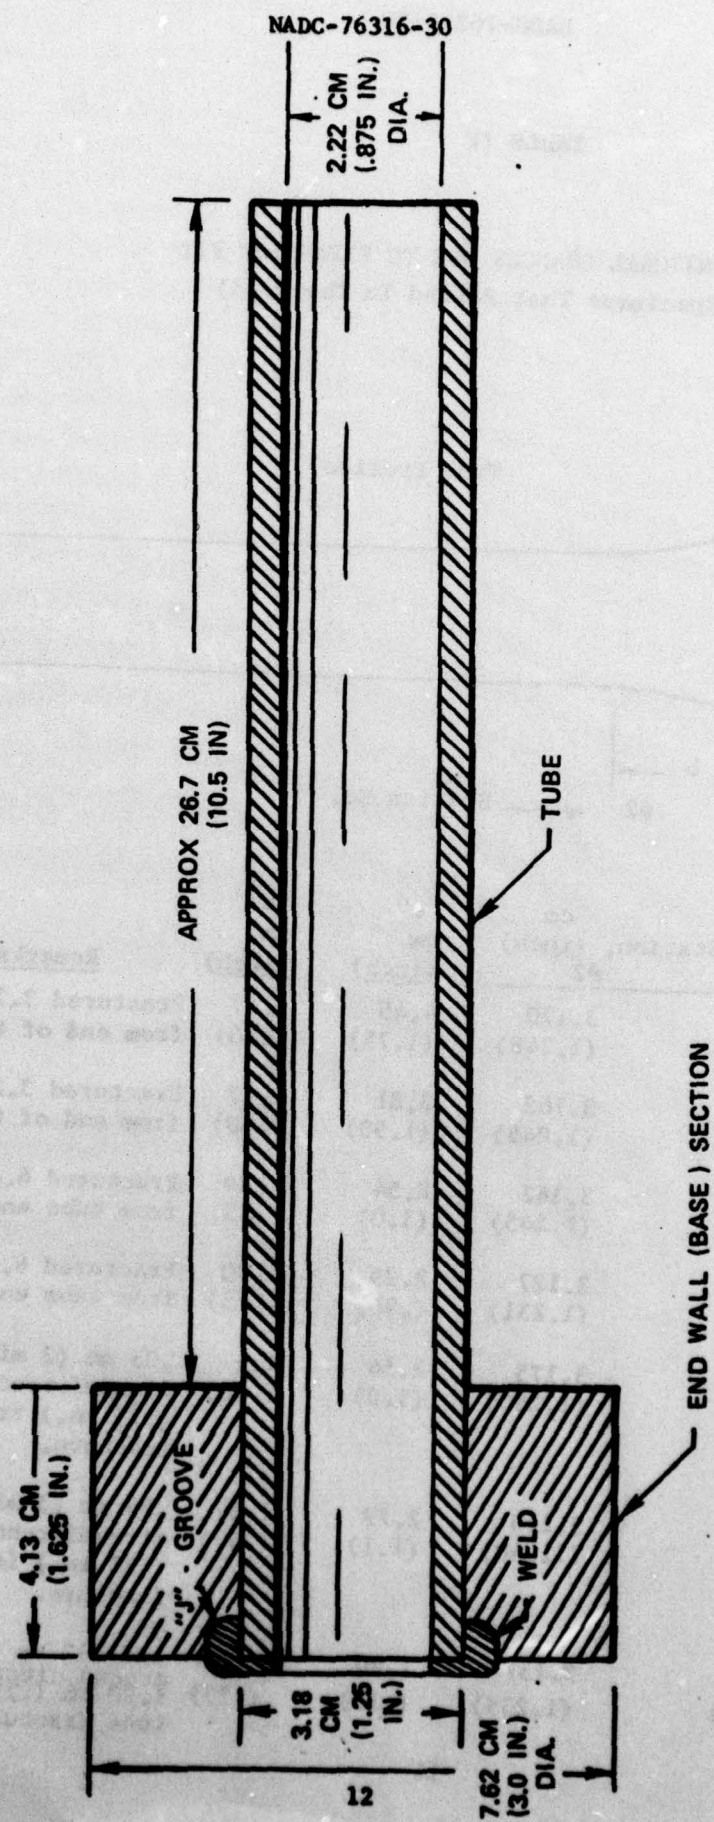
Manually Welded Test Specimen Design (Nominal Dimensions)
